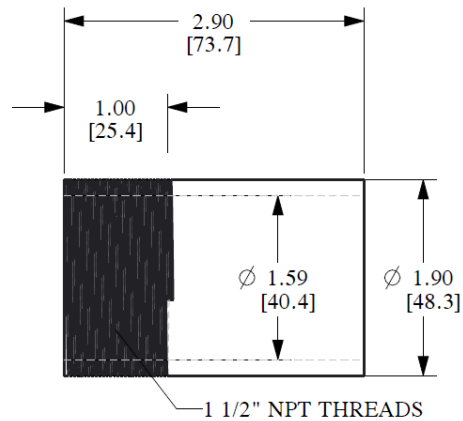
S-7. Dimensioned Drawing of the Pipe Nipple
